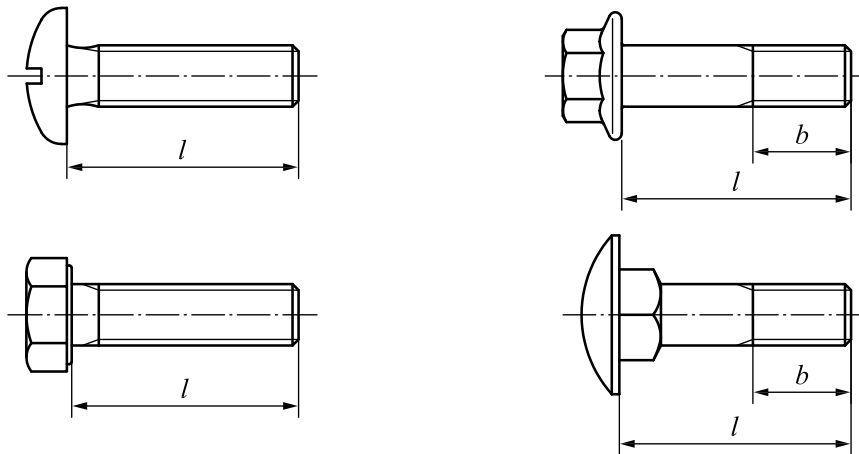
Length for bolts and screws with effective bearing surface perpendicular to the axis
